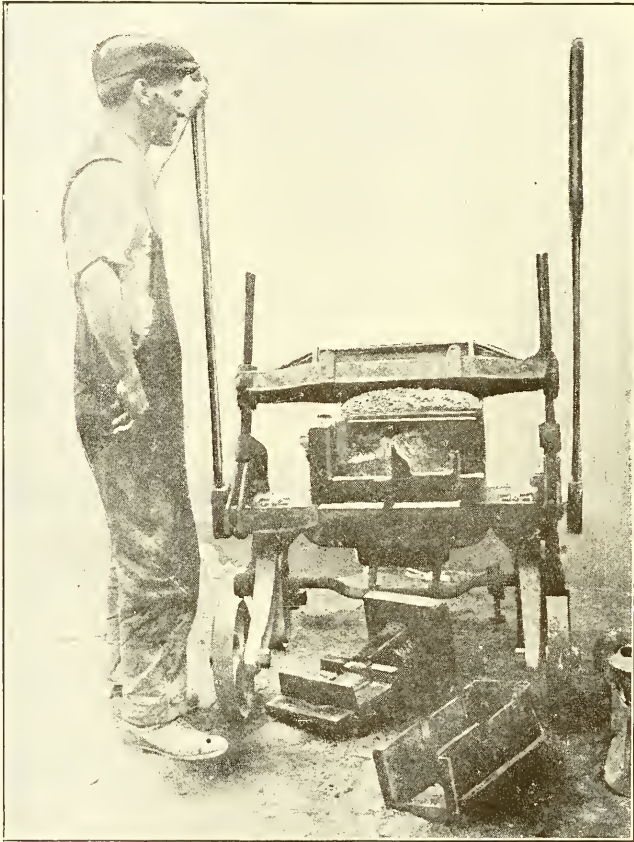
Ramming Molds on a Squeezing Machine. Wooden Patterns and Sheet-Iron Mold Box in Foreground.
